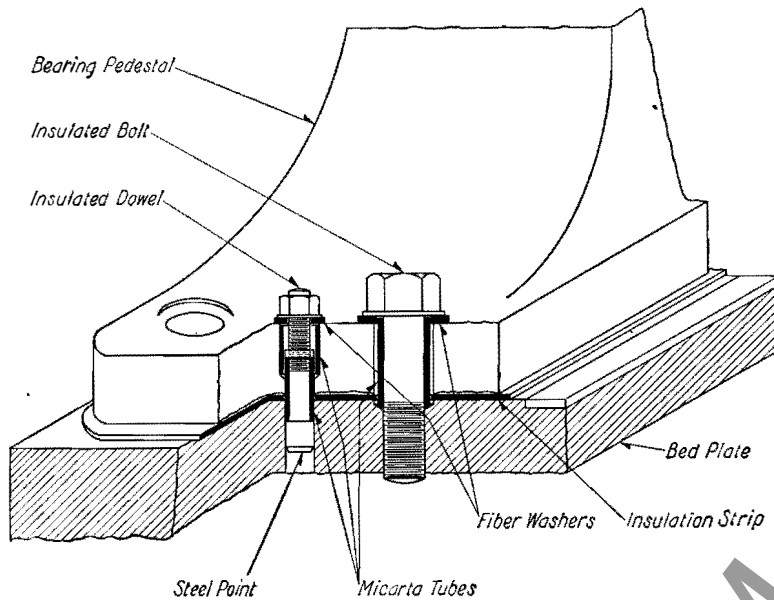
METHOD OF INSULATING BEARING PEDESTAL FROM BEDPLATE
